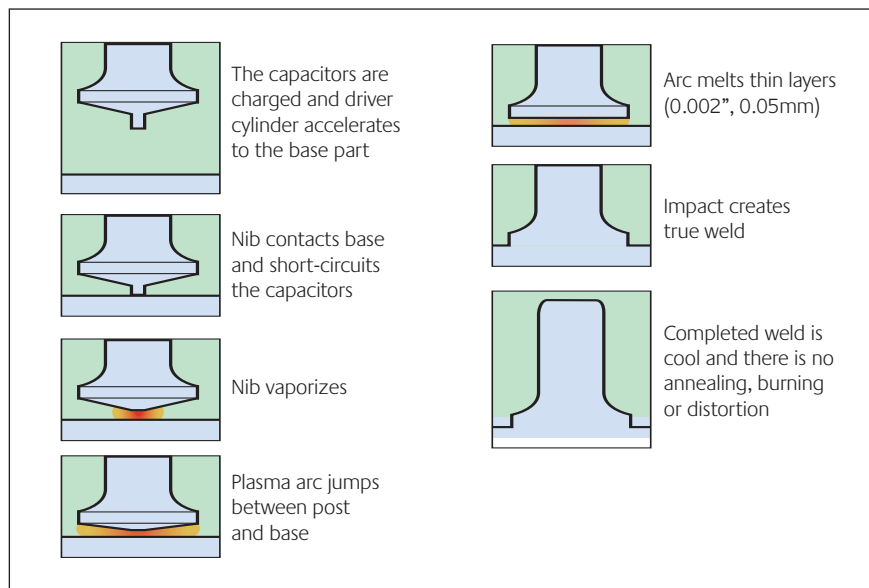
Process stages in electric discharge fusion welding. (Courtesy J. Alves)
